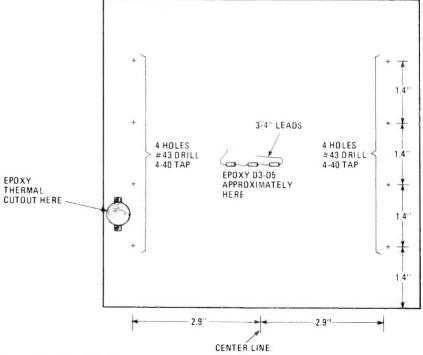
HEAT-SINK DRILLING GUIDE. Note that some parts are fastened with epoxy to the heat sink.
